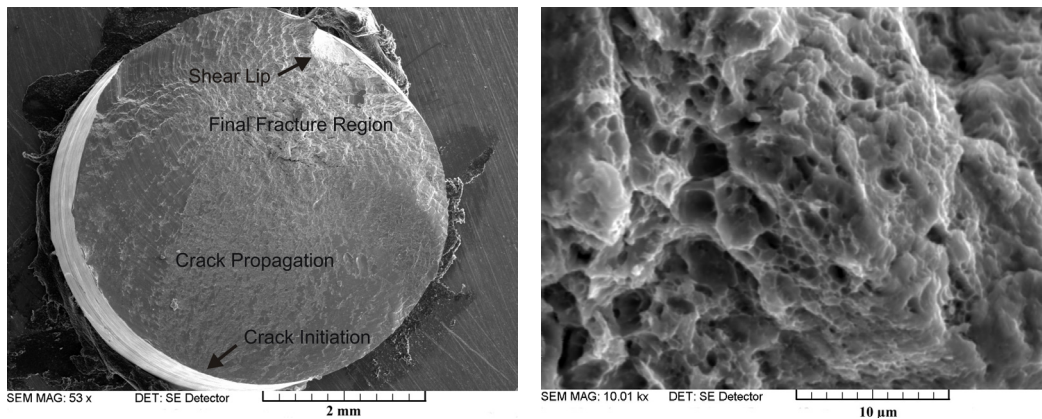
Typical SEM micrographs of the base metal, tested at 475 MPa, a) Fatigue fracture surface and b) Final fracture region.
